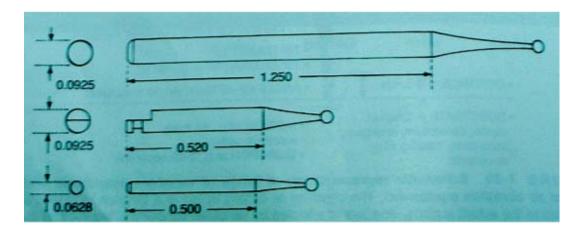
Typical dimensions (in inches) of three common instrument shank for straight handpiece, latch-angle handpiece, and friction-grip angle handpiece type
